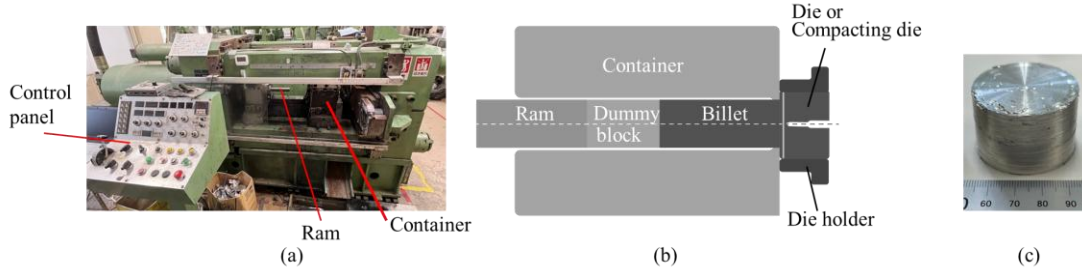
(a) 2000 kN horizontal extrusion machine, (b) Schematic view of compacting and extrusion, (c) Chip billet (Density : 2.607g/cm³)
